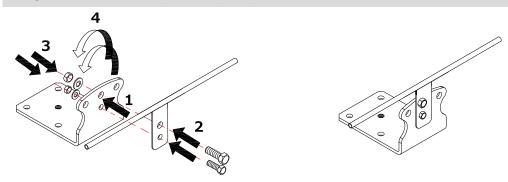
Assembly of the LVB/LVBD device with adjustable straight cable support for glider (Cod. 001347)
